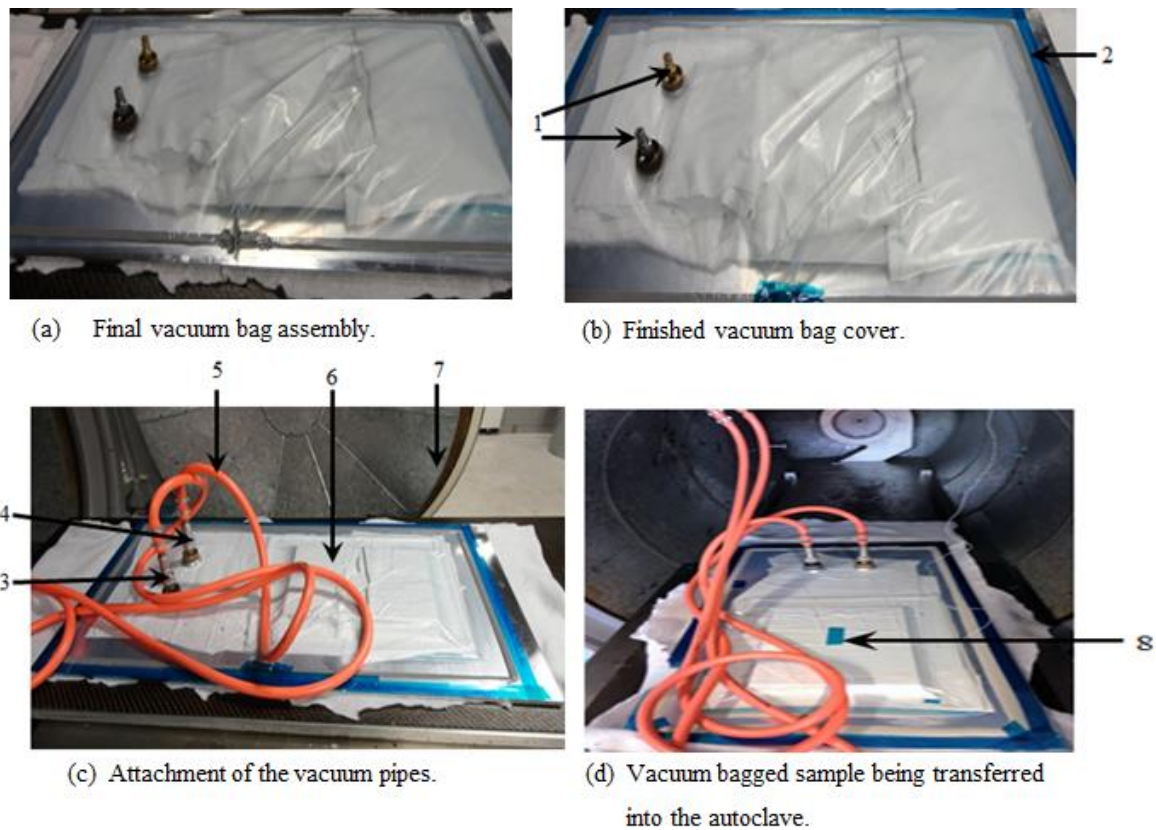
Photographs showing finished sample preparation ready for curing in the autoclave: (1) Breach vacuum valves; (2) Flash tape; (3) Breach vacuum valve fitted with hose; (4) Breach vacuum testing valve fitted with hose; (ISO 527-5:2009) hose pipe; (6) vacuumed sample; (7) Autoclave door; and (8) Thermocouple.
